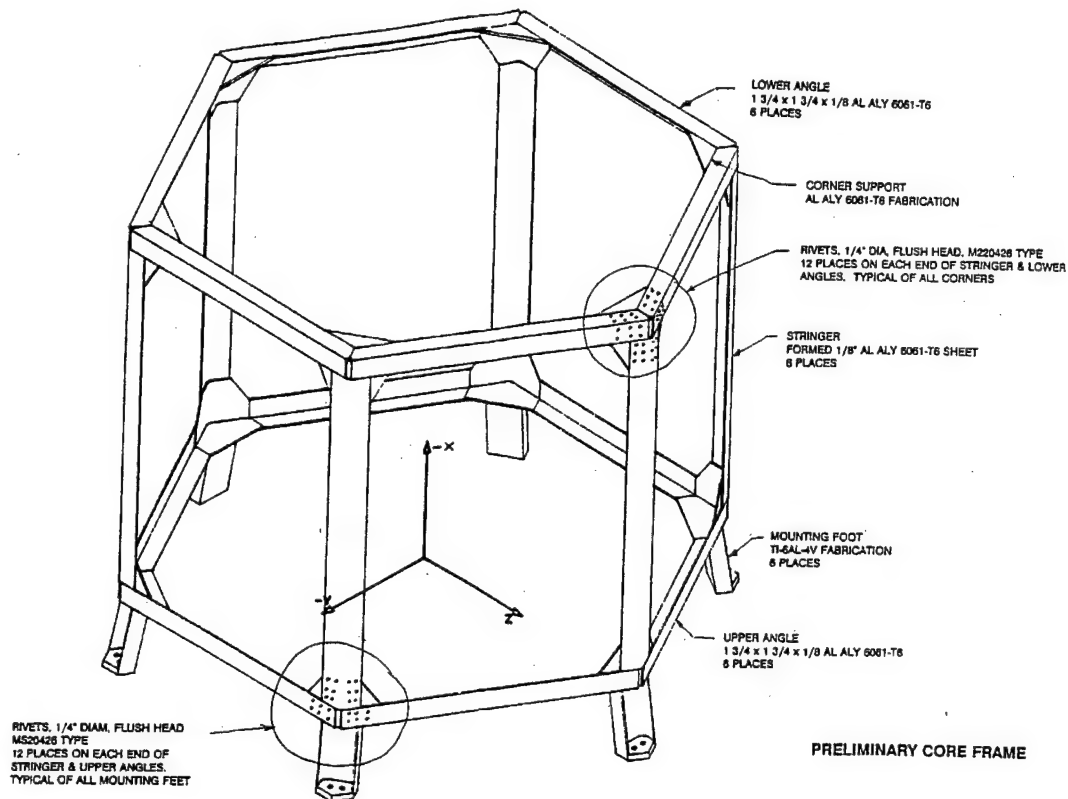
Arcjet ATTD Six-Point Mounting Configuration
